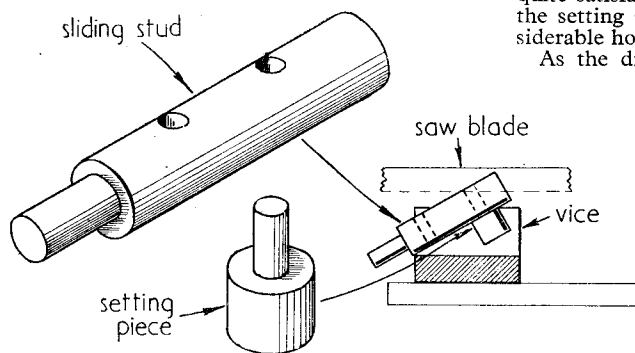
Setting the vice for sawing the sliding stud in the machine saw
